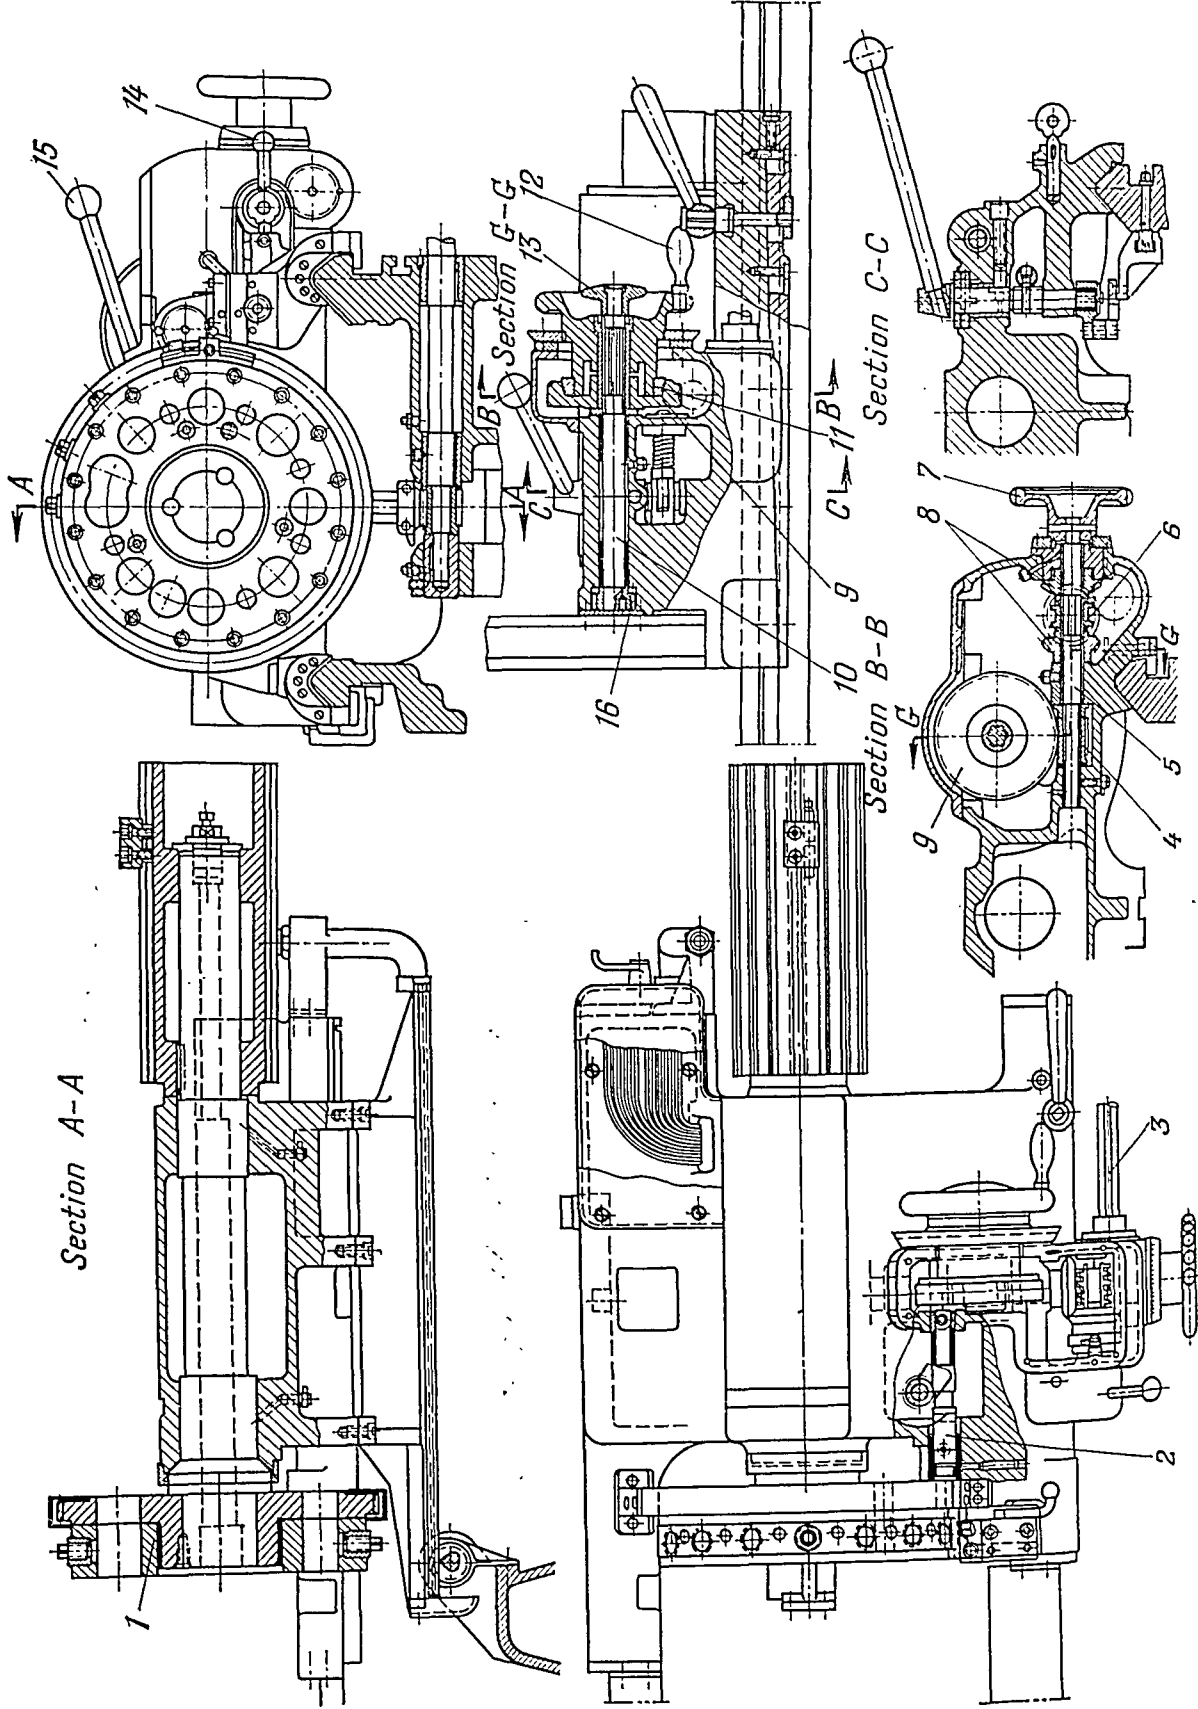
Turret middle unit of a turret lathe with a horizontal axis of turret rotation
